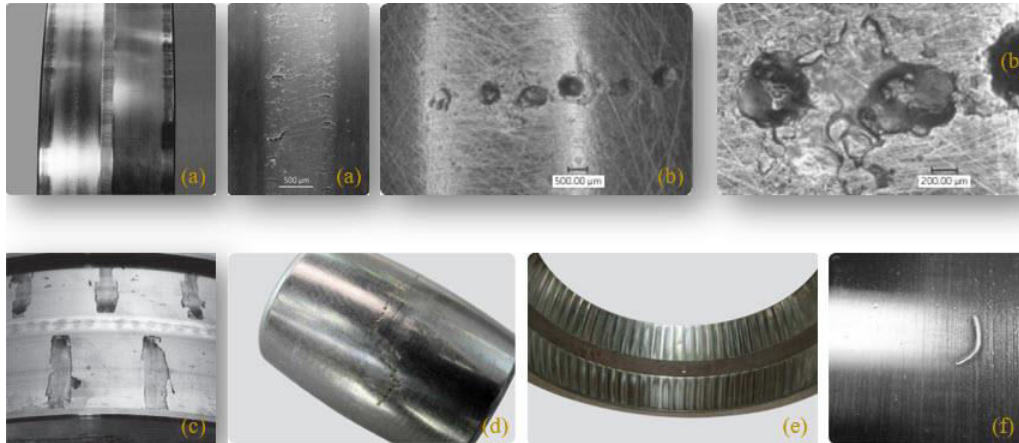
Types of spherical roller bearing defects/failures (a) micropalls, (b) Excessive current erosion on the roller of a spherical roller bearing, (c) initial patches of etching at rolling element pitch on the inner ring raceways, (d) excessive craters in a zig-zag formation, (e) exposure to excessive vibrations at standmills, (f) overrolled swart/chip will lead to spalling (Source: Bearing damage and failure analysis - SKF).
